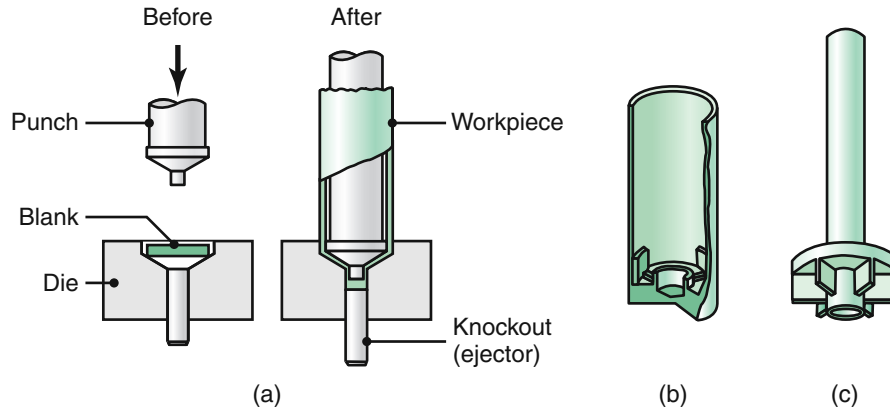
(a) Impact extrusion of a collapsible tube by the *Hooker process*. (b) and (c) Two examples of products made by impact extrusion. These parts also may be made by casting, forging, or machining. The choice of process depends on the materials involved, part dimensions and wall thickness, and the properties desired. Economic considerations also are important in final process selection.
